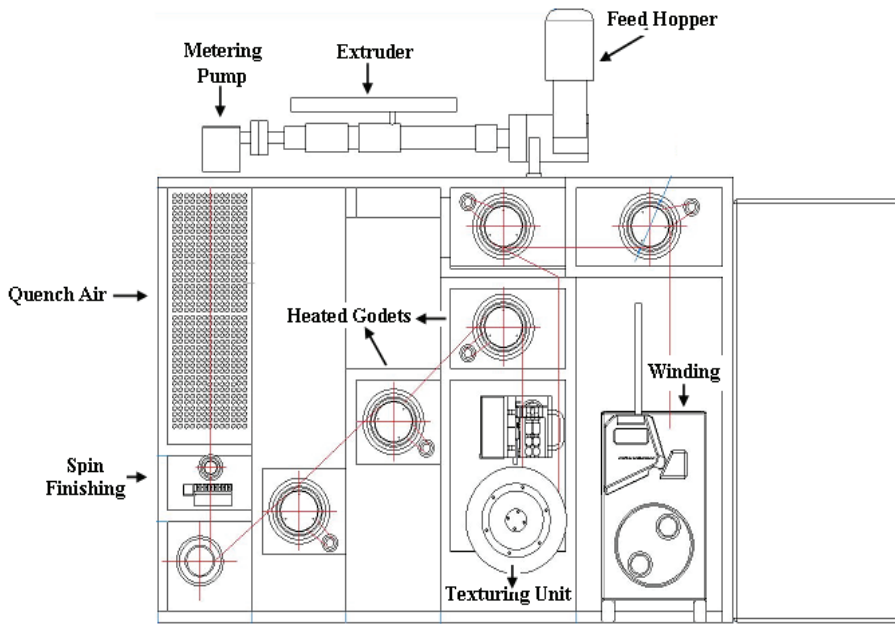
Technical Drawing of Developed Lab-Type Filament Drawing Machine (LabFil) (Hacıoğulları Özkan and Babaarslan, 2015)
